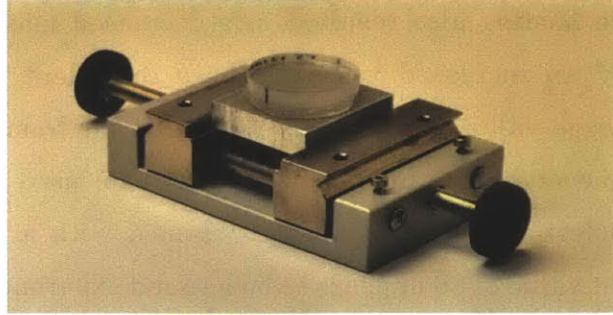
Sample holder clamping a rectangular aluminum base on which a disk sample of fused silica has been glued.
